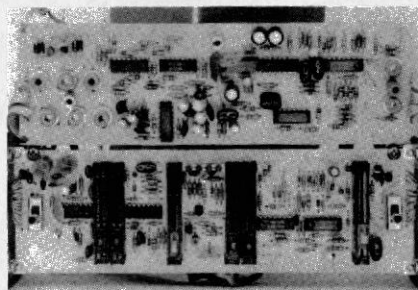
COMPONENT SIDE of the front and rear PC boards. The two boards are connected by 12-conductor ribbon cable.
